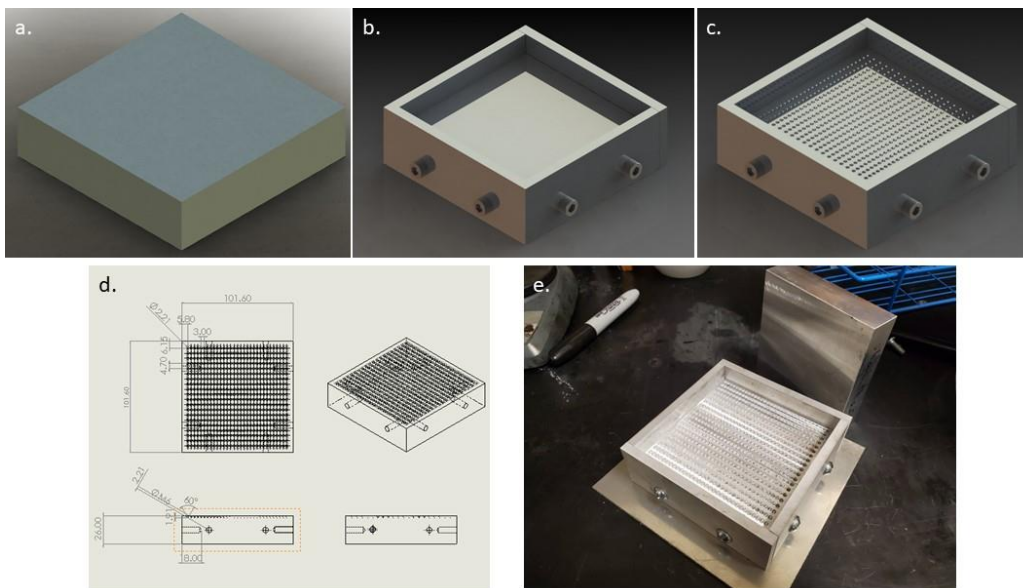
Mold components and design a. the top plunger part, the bottom part assembly c. the meta-structure machined on the bottom part surface d. the CAD design of the mold e. the physical fabricated mold.
